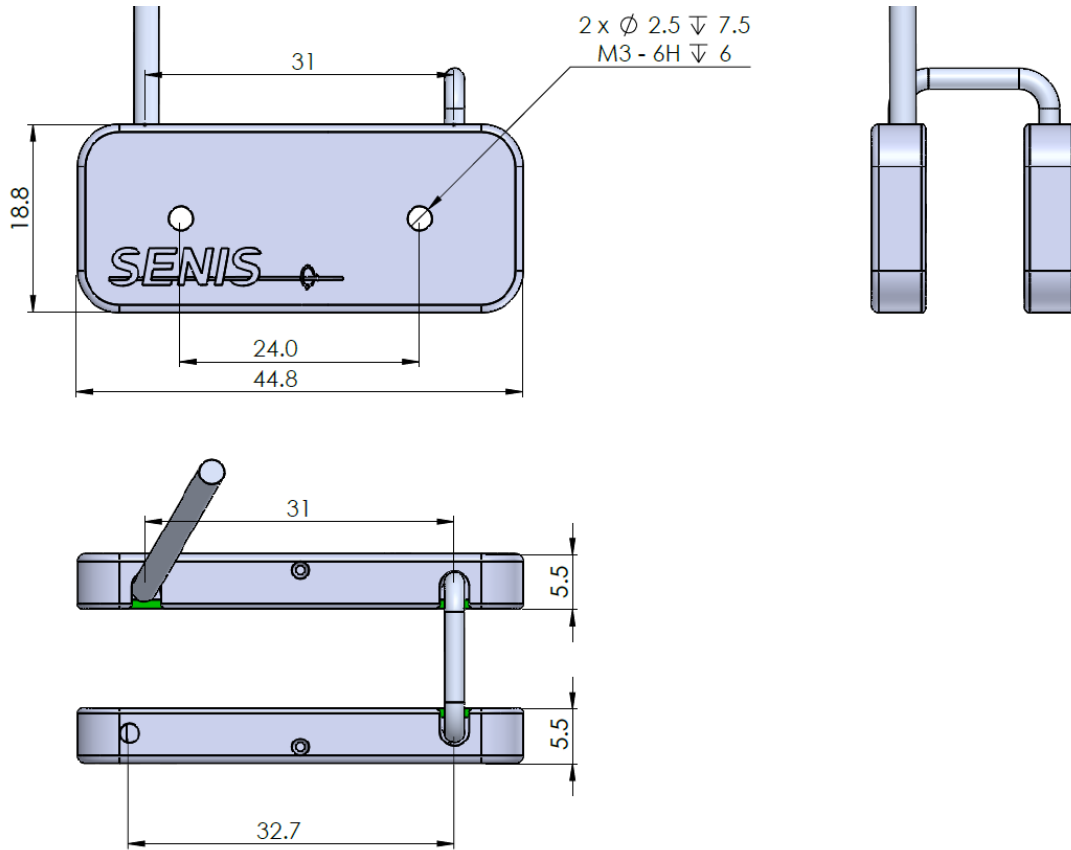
Mechanical dimensions (all dimensions are in millimeters).
